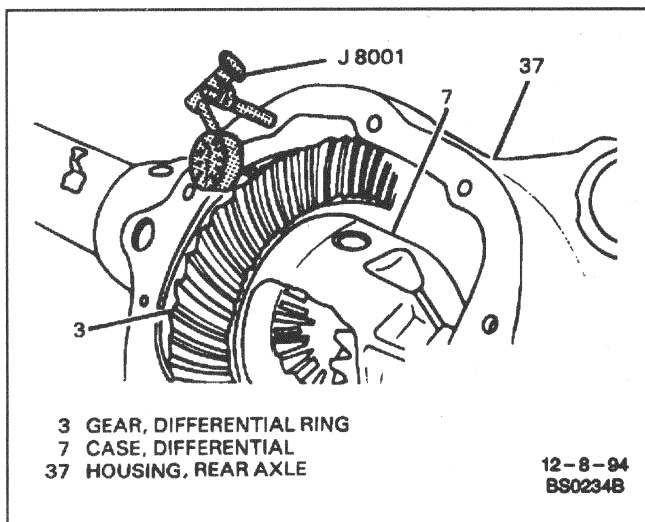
Checking Differential Ring Gear-to-Differential Drive Pinion Gear Backlash
